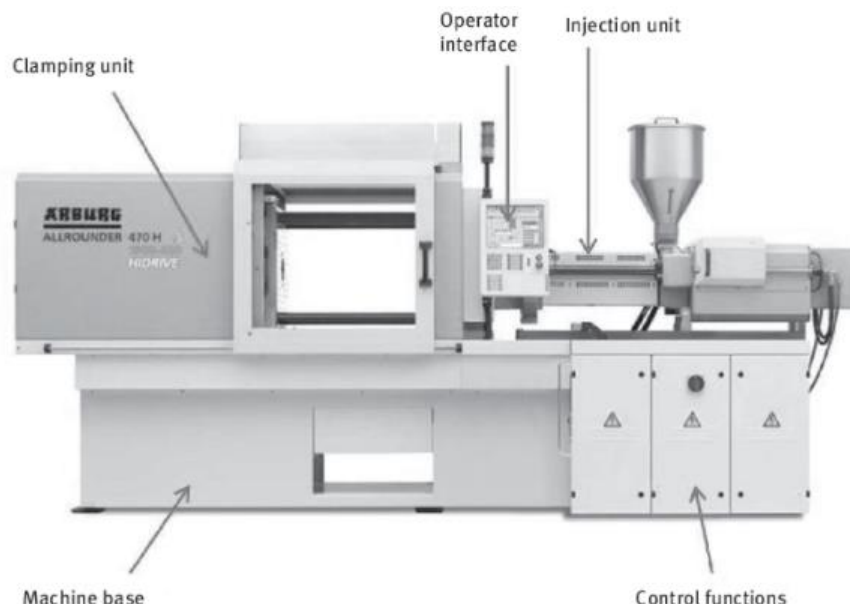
The basic parts of an injection moulding machine (Goodship, V. (ed.), 2020, ch.1).
